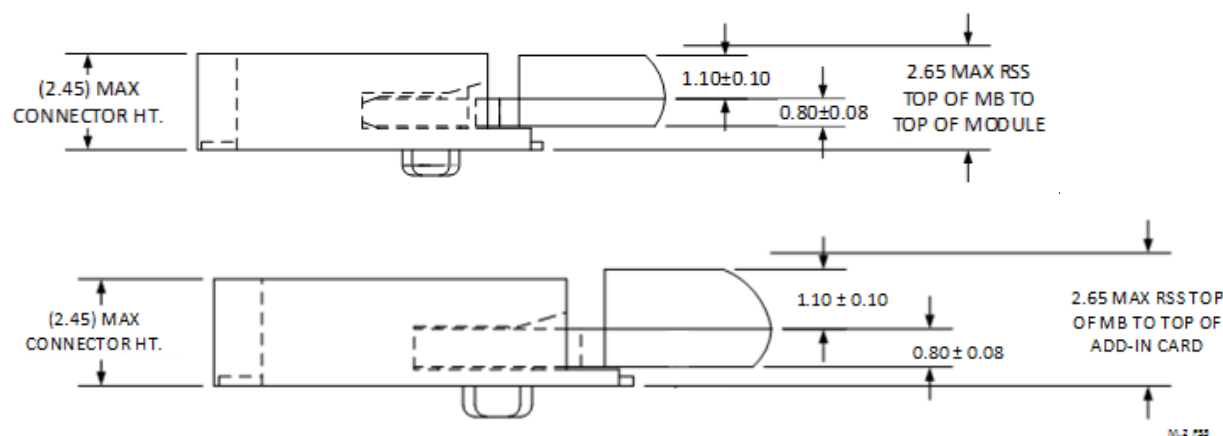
H2.5-S1 - Stack-up Top Mount Single-sided Add-in Card for 1.20 Maximum Top-side Component Height and with Higher Clearance above Motherboard
